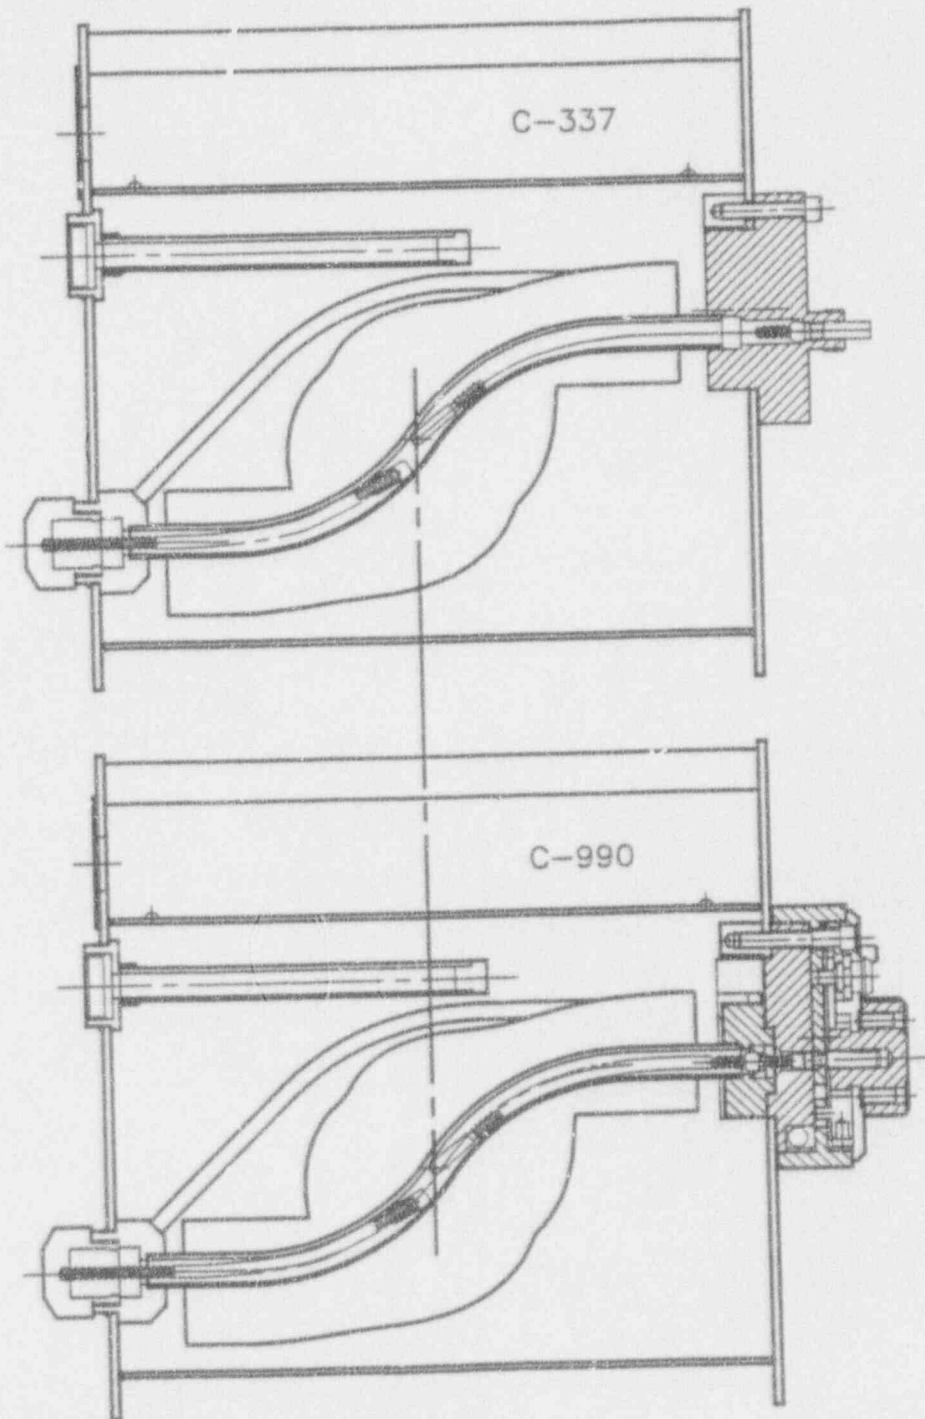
Shield Jig and C-337 Source Assembly for Final Radiation Shielding Test.
